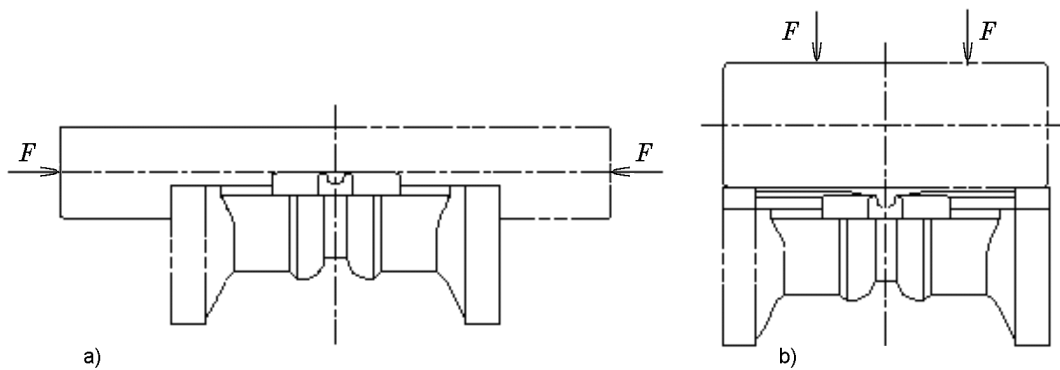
Schematic drawing of pre-forging scheme. a) Upsetting scheme model form two ends. b) Extruding scheme model
